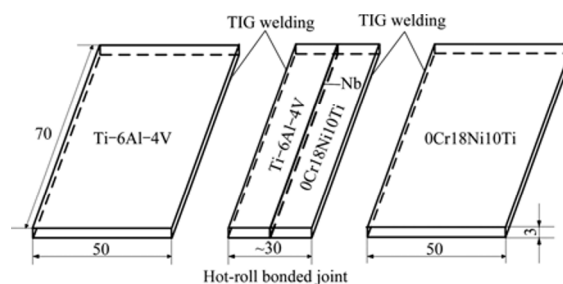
Schematic diagram of TIG welding of hot-roll bonded joint to titanium alloy and stainless steel (unit: mm)
